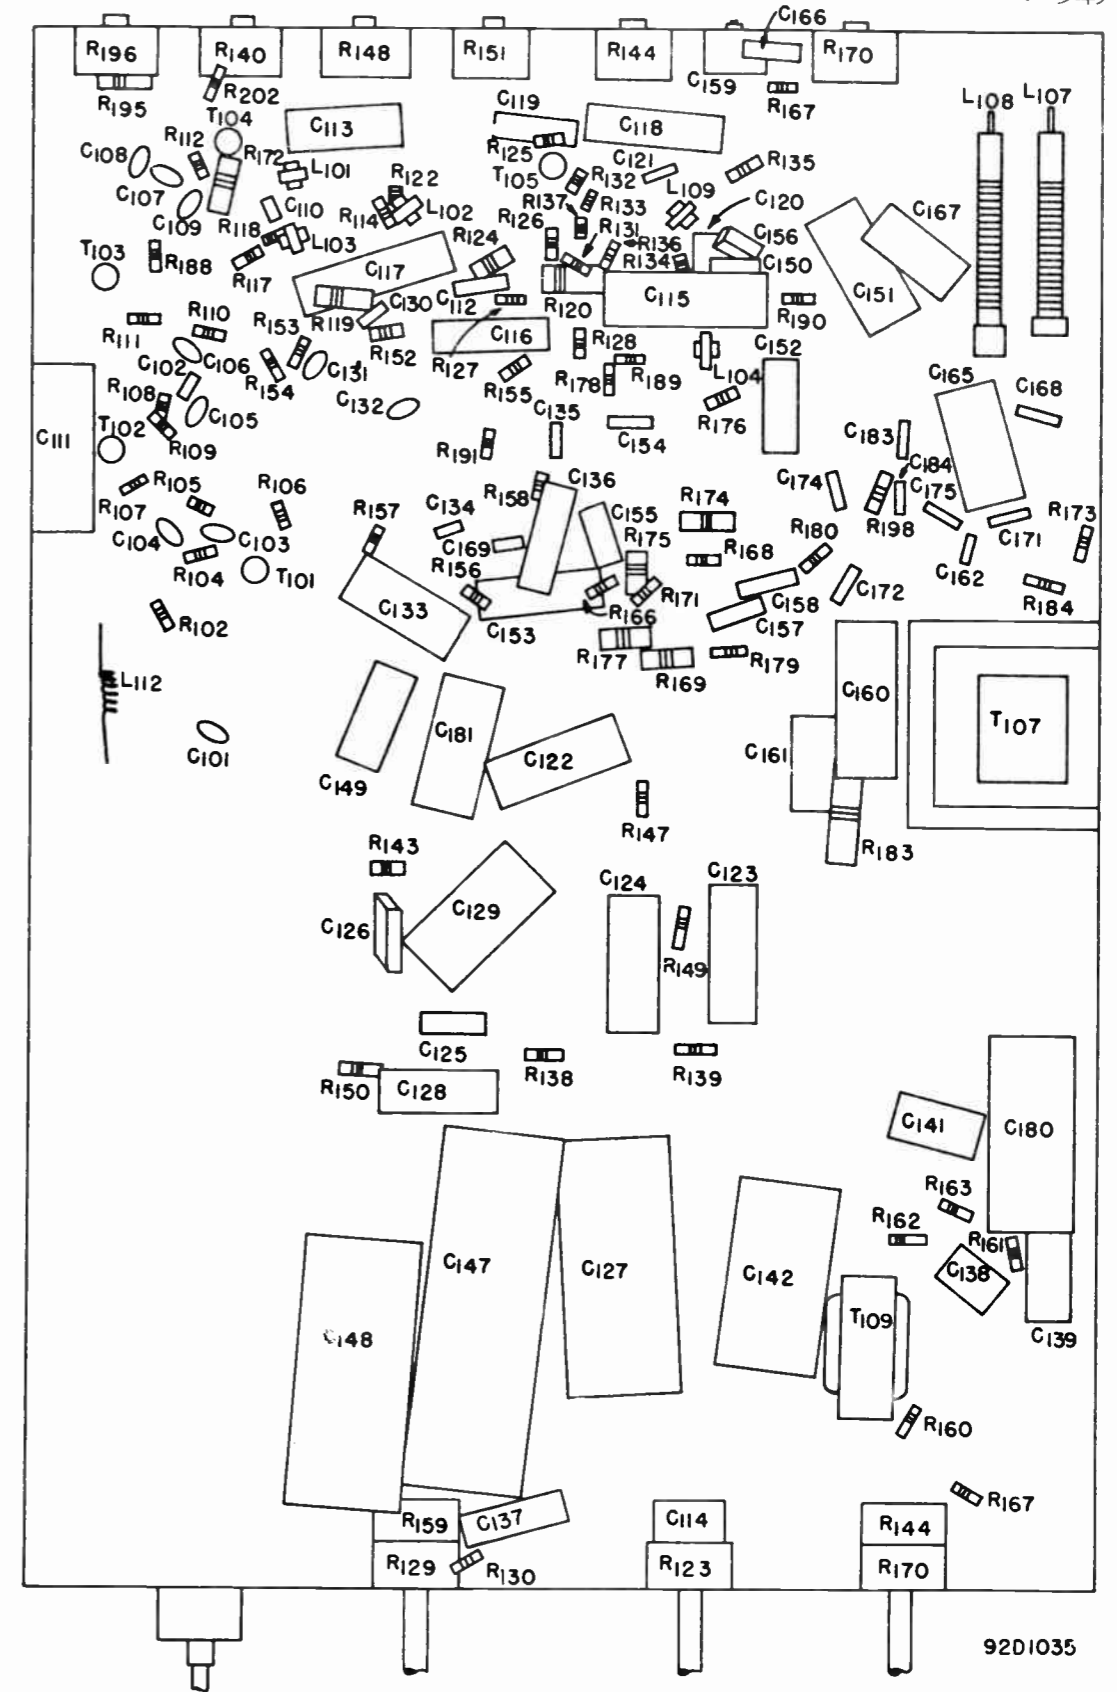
BOTTOM VIEW - COMPONENT LOCATION
